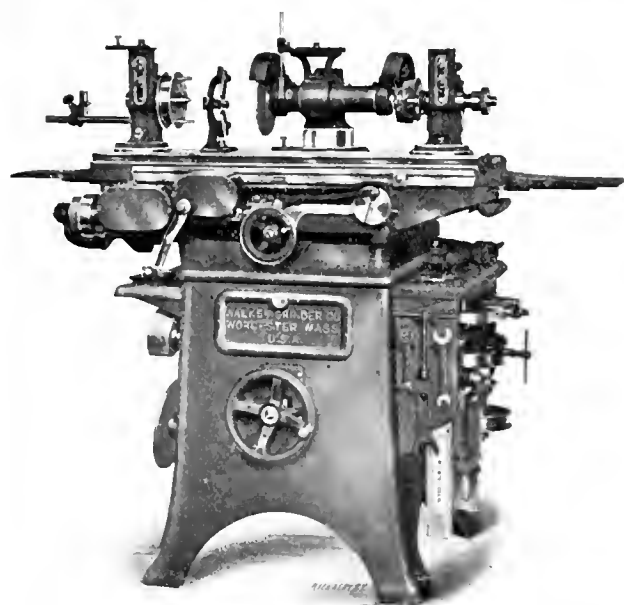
The Walker No. 21-2 Tool-room Grinder.
